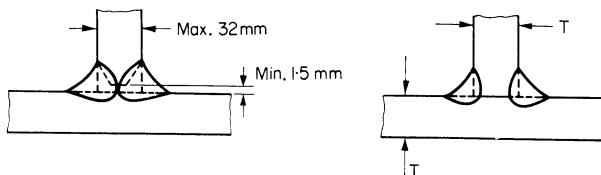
Recommended designs for tee-welded joints
